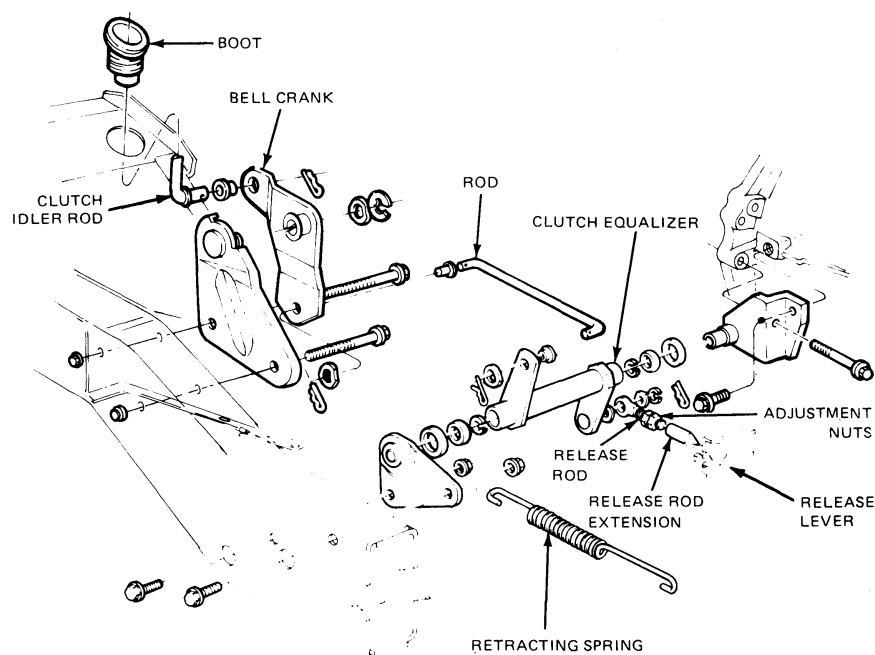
Clutch Equalizer Shaft—E-100—E-350
